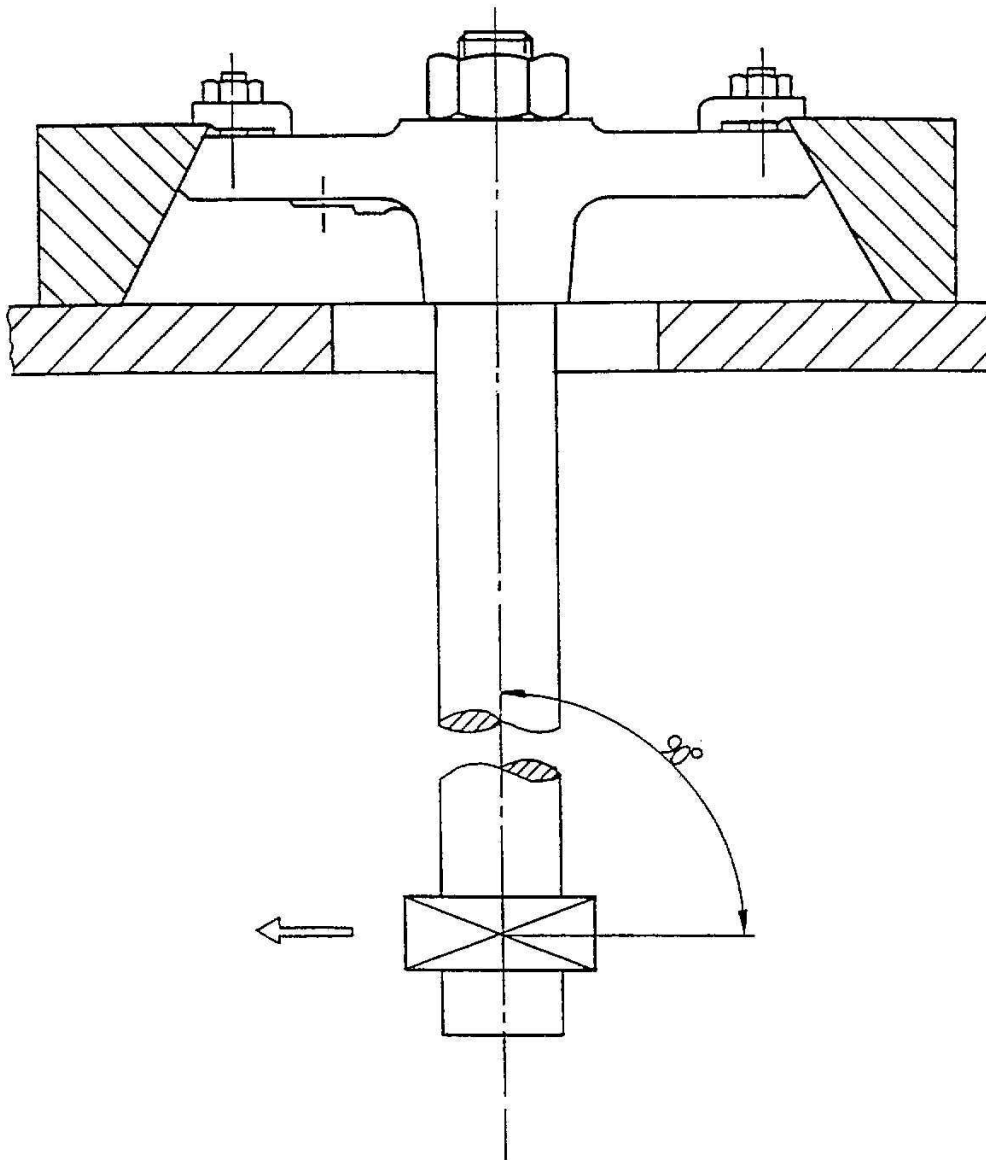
DYNAMIC CORNERING FATIGUE TEST - SPOKE WHEELS
